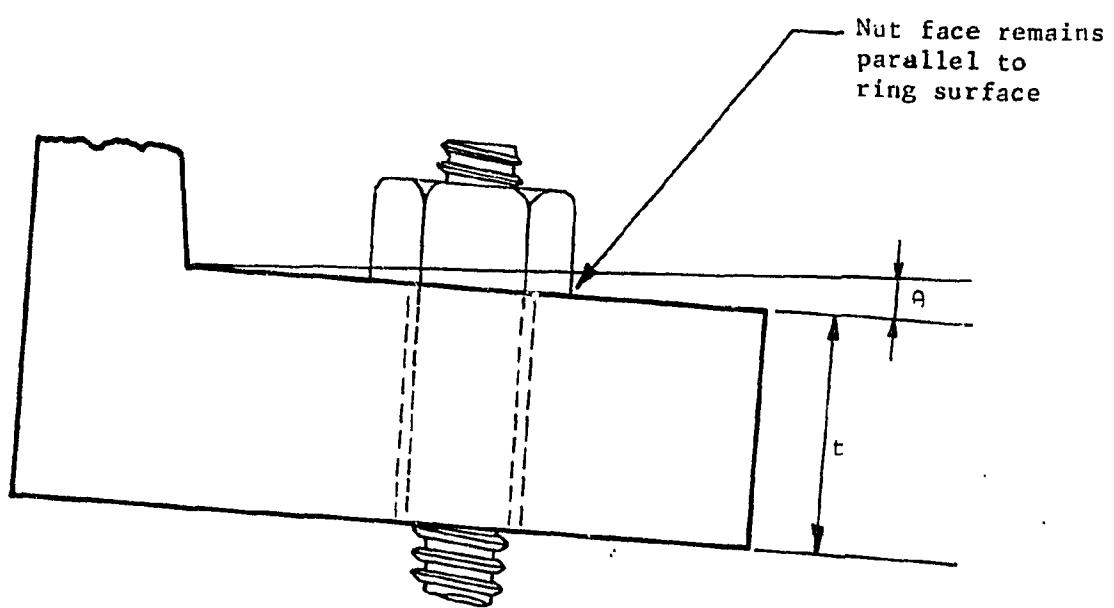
ASSUMPTION USED IN CALCULATING BOLT BENDING STRESS
